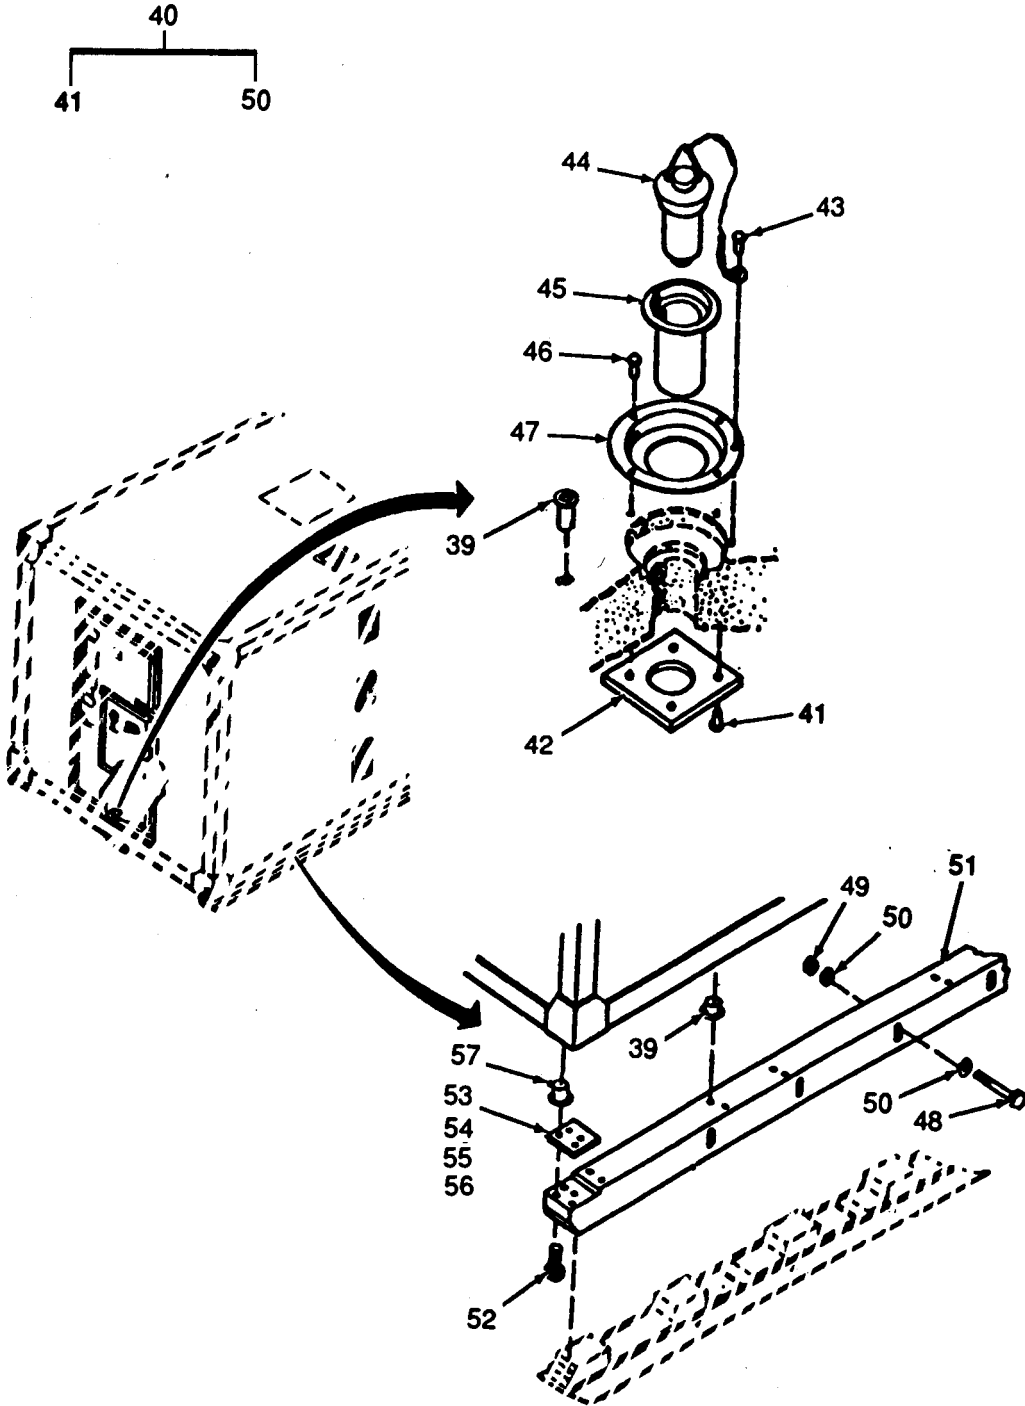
Shelter, Electrical Equipment S-280C/G (Sheet 3 of 3)
